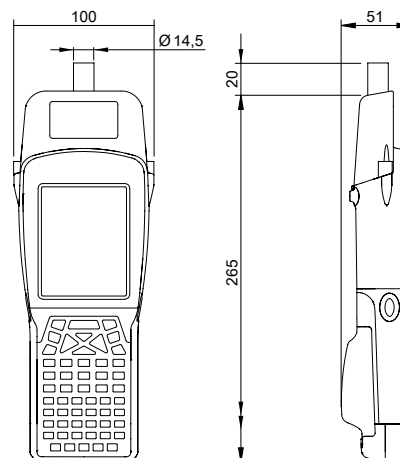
Dimensions BIS M-873-1-0__X-001 (in mm)
